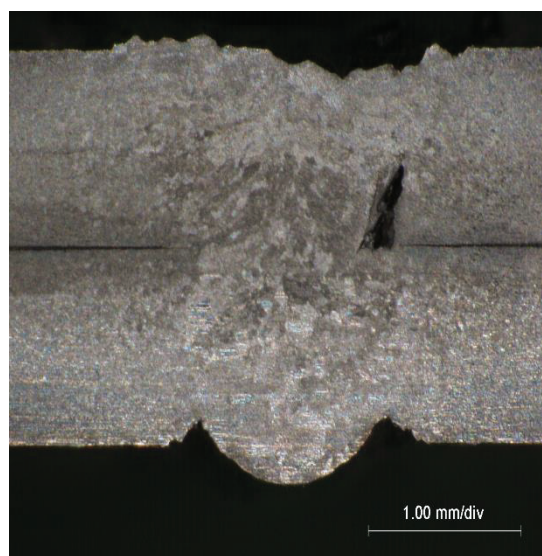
Cross section of weld defect at 0 mm gap between steel sheets¹⁰⁾.
